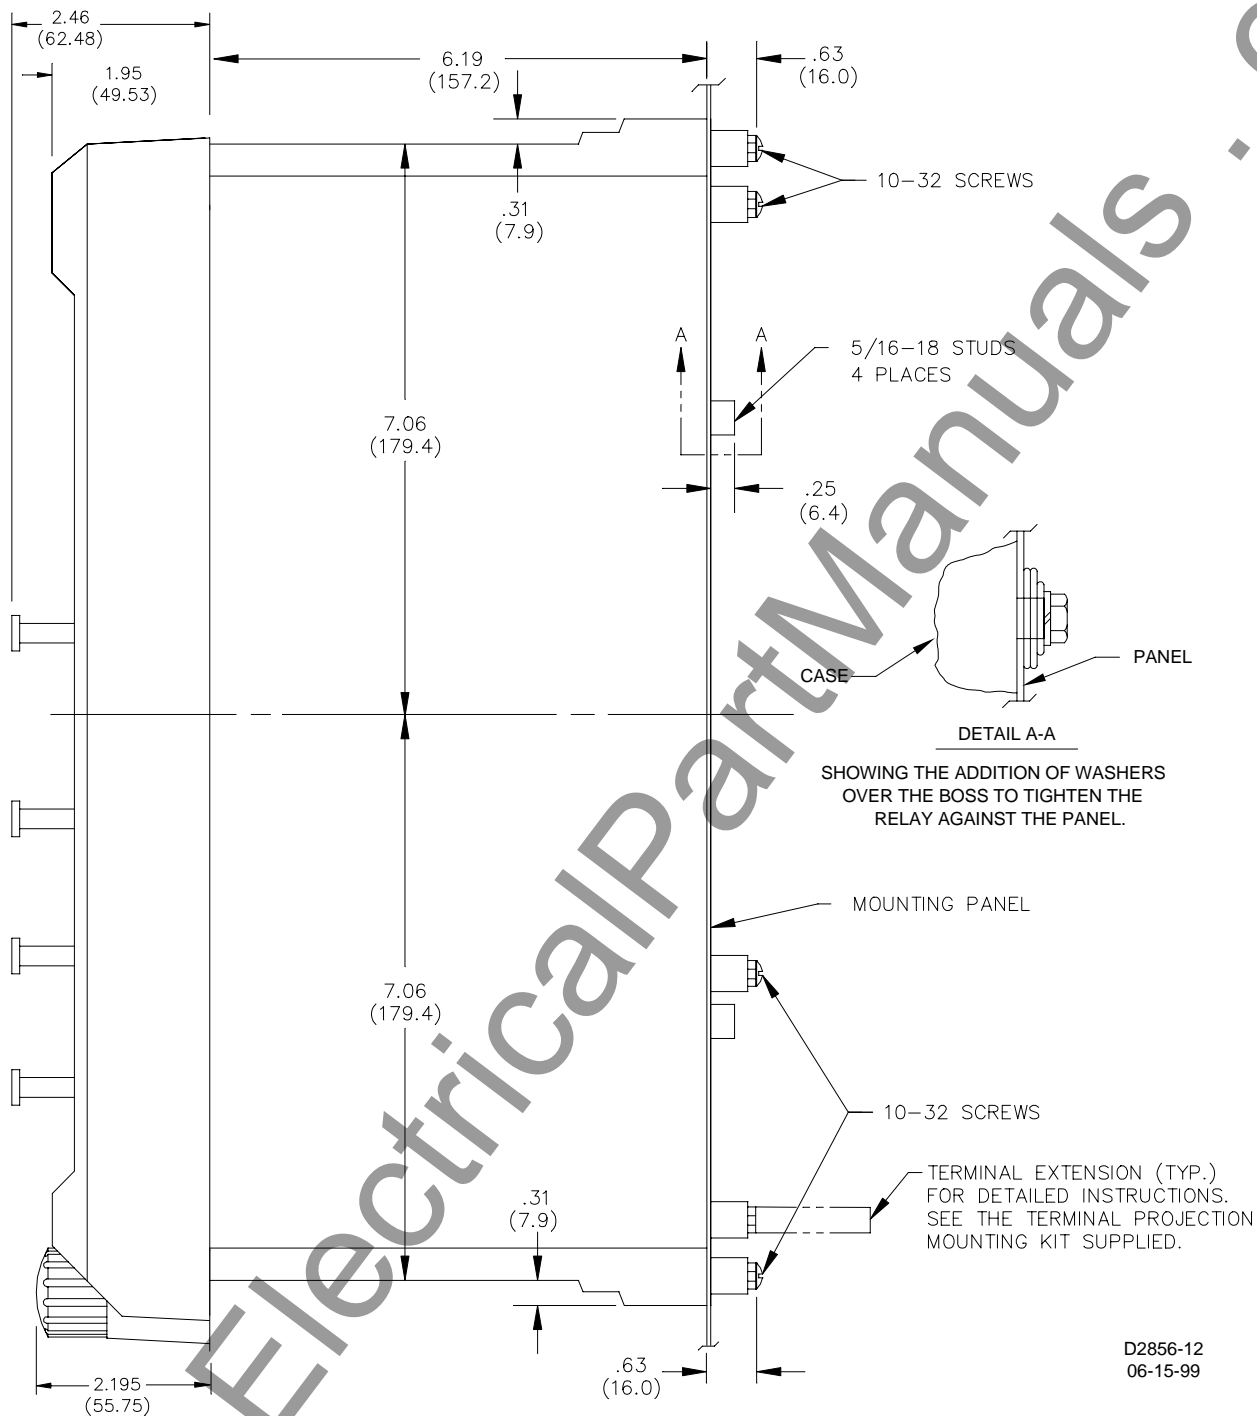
M1 Case, Double-Ended, Projection Mounting, Side View
